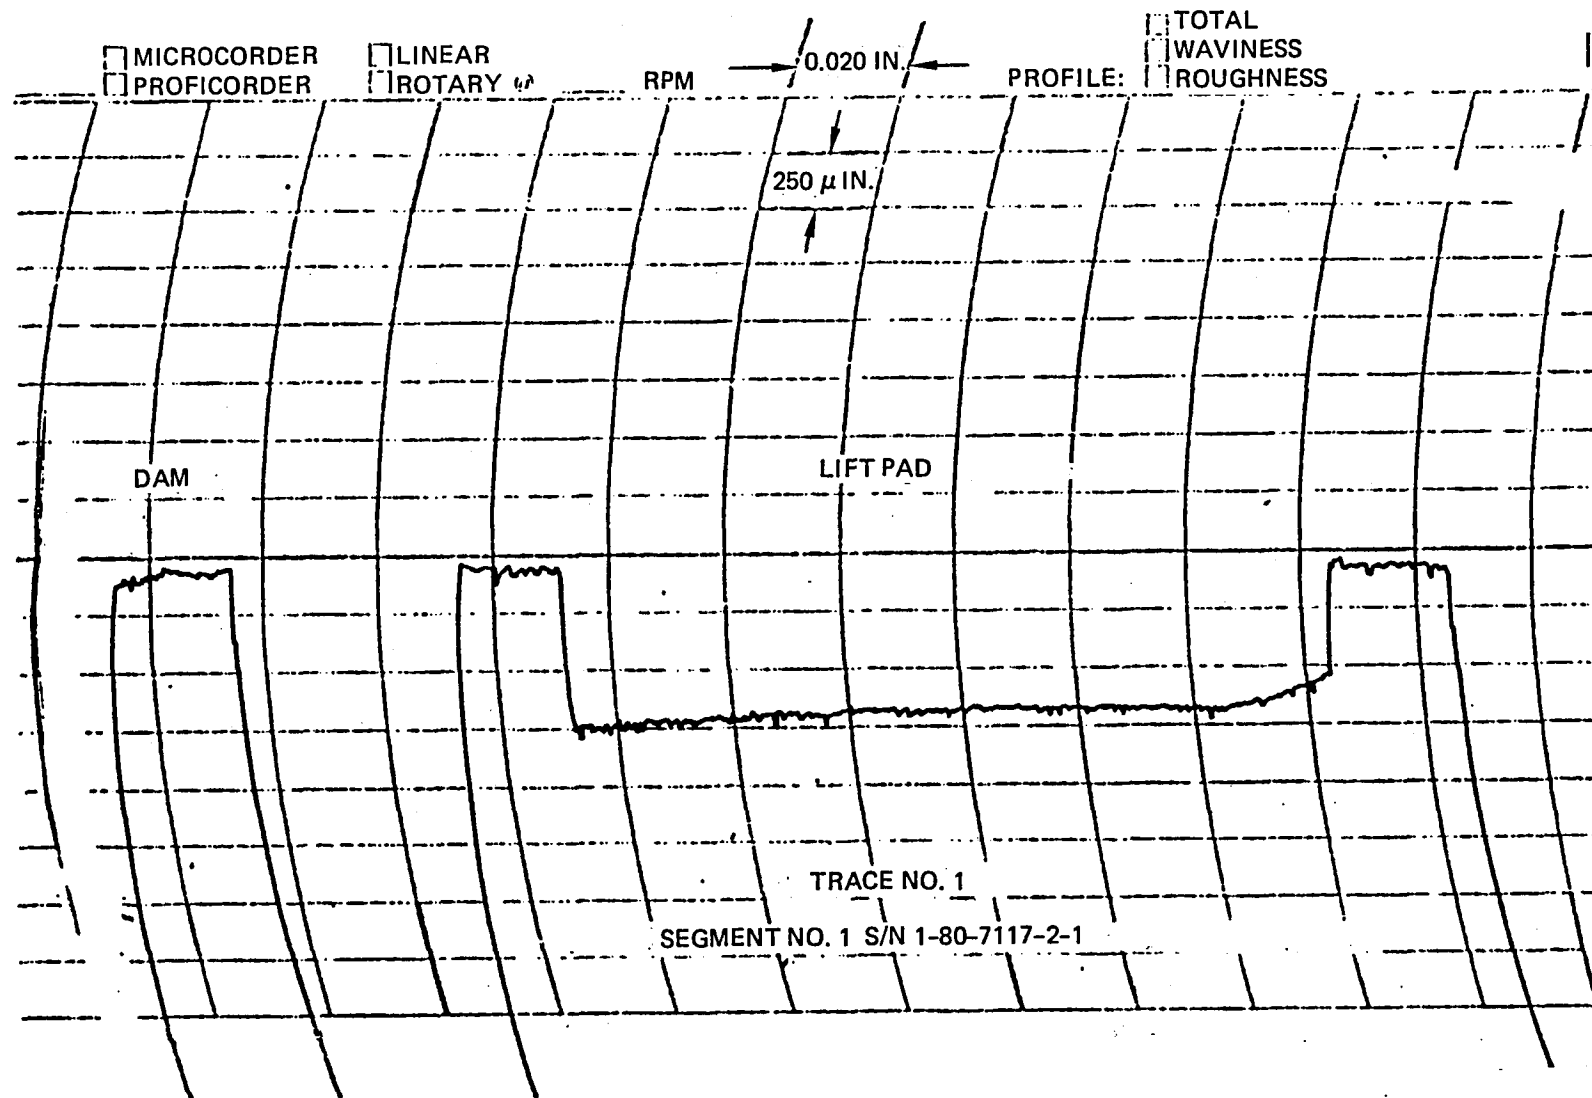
Typical Surface Profile Trace of Rayleigh Step Segmented Carbon Turbine Side Seal Ring P/N 7117-07, New
